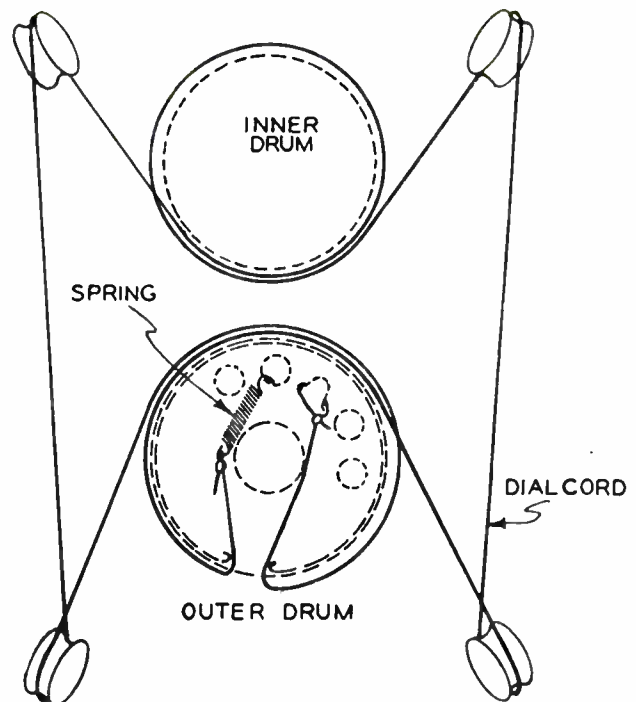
An Exploded View of Dial Cord Arrangement. Dial Cord length: 22 inches, from the inside of the two loop knots.
